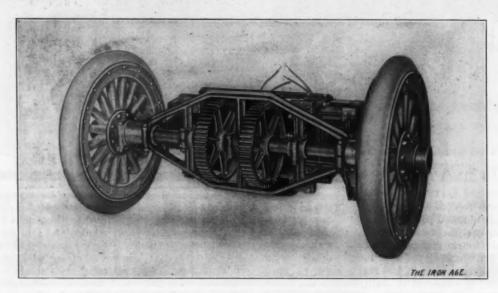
Rear Axle as Seen from Behind with Gear Case Removed.
